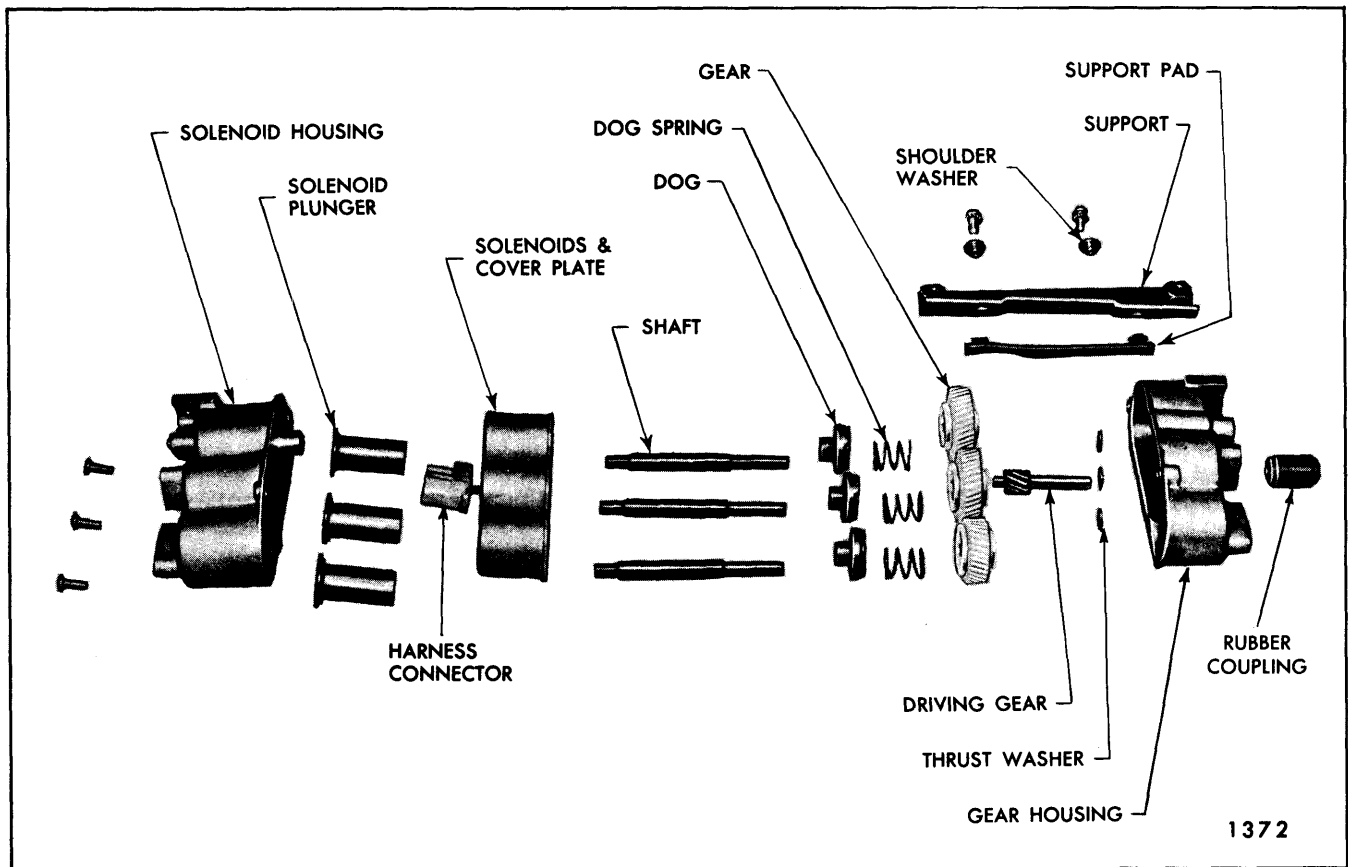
Six-way Seat Adjuster Transmission - "B & C" Full Width Seat
